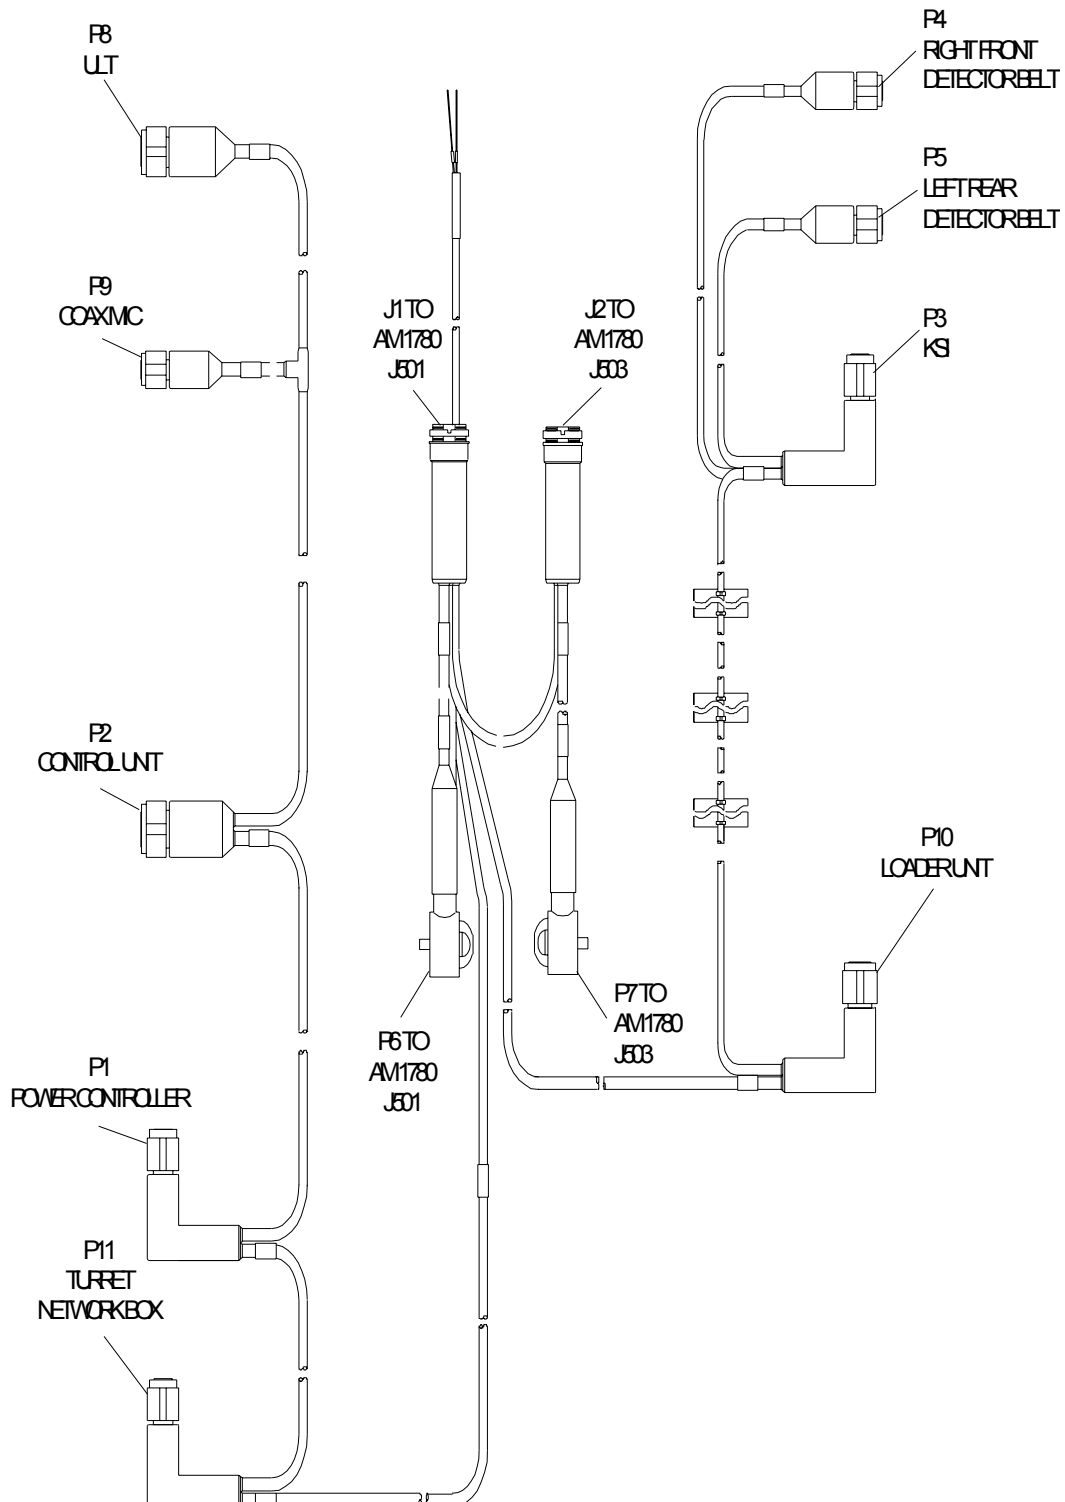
M1A1 VIC Internal/External System Cable Assembly.
